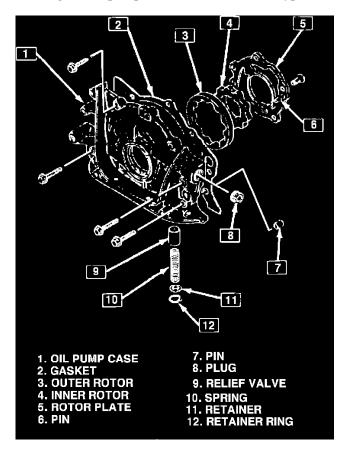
Oil pump removal 1988 Rotary Type (Trochoid)
